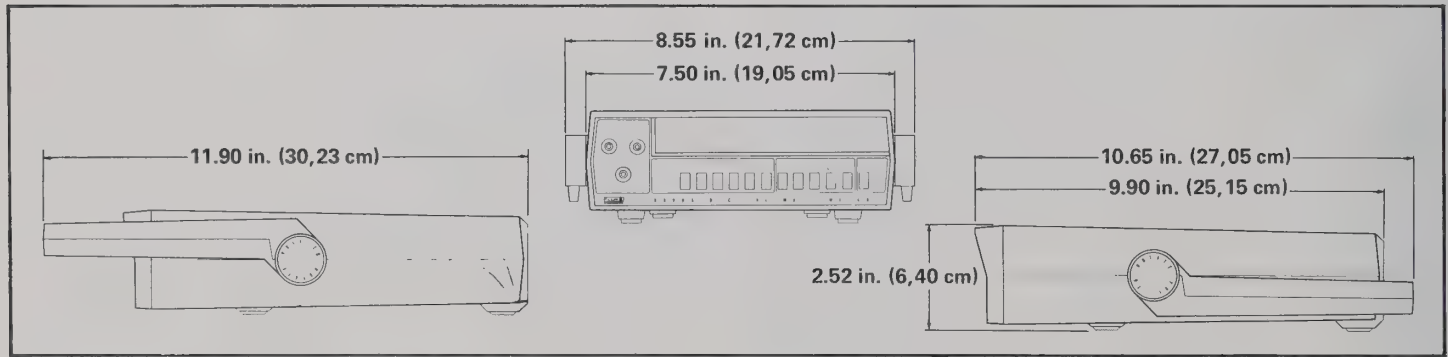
MODEL 8000A OUTLINE DRAWING
